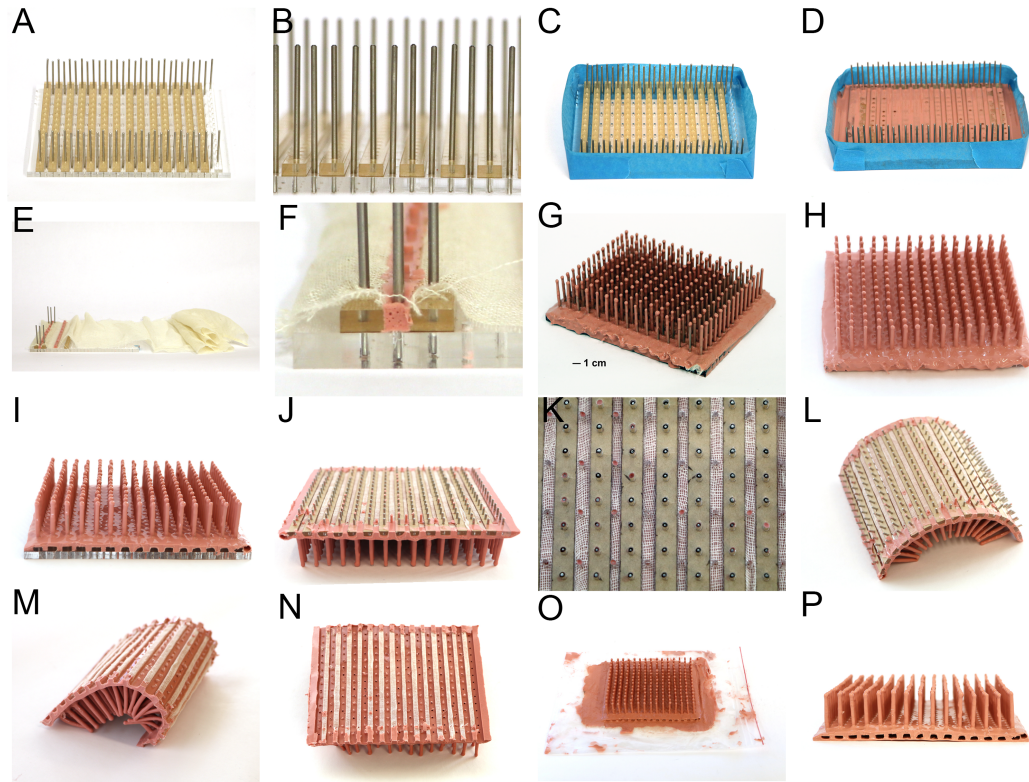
Overview of the fabrication process for actuator arrays. (A-B) The mold is pinned together, (C) masking tape is added, and (D) rubber is poured to form spacers. The mold is disassembled and (E-F) reassembled with cheesecloth weaving under the acrylic rails and over the rubber spacers. After coating the pin tips (G) a layer of rubber is poured over the top of the array, which is then cured at an angle. (H) Additional layers are poured over the mold and cured at an angle. (I) The array is trimmed and (J) the base plate of the mold form is removed. (K) The cheese cloth on the bottom has been intentionally kept clear of the rubber poured on top. (L-M) The acrylic rails are removed and (N) then the pins are removed. (O) The bottom is sealed by placing the array over a pool of rubber with a layer of cheesecloth. (P) The array is trimmed and ready for plumbing.
